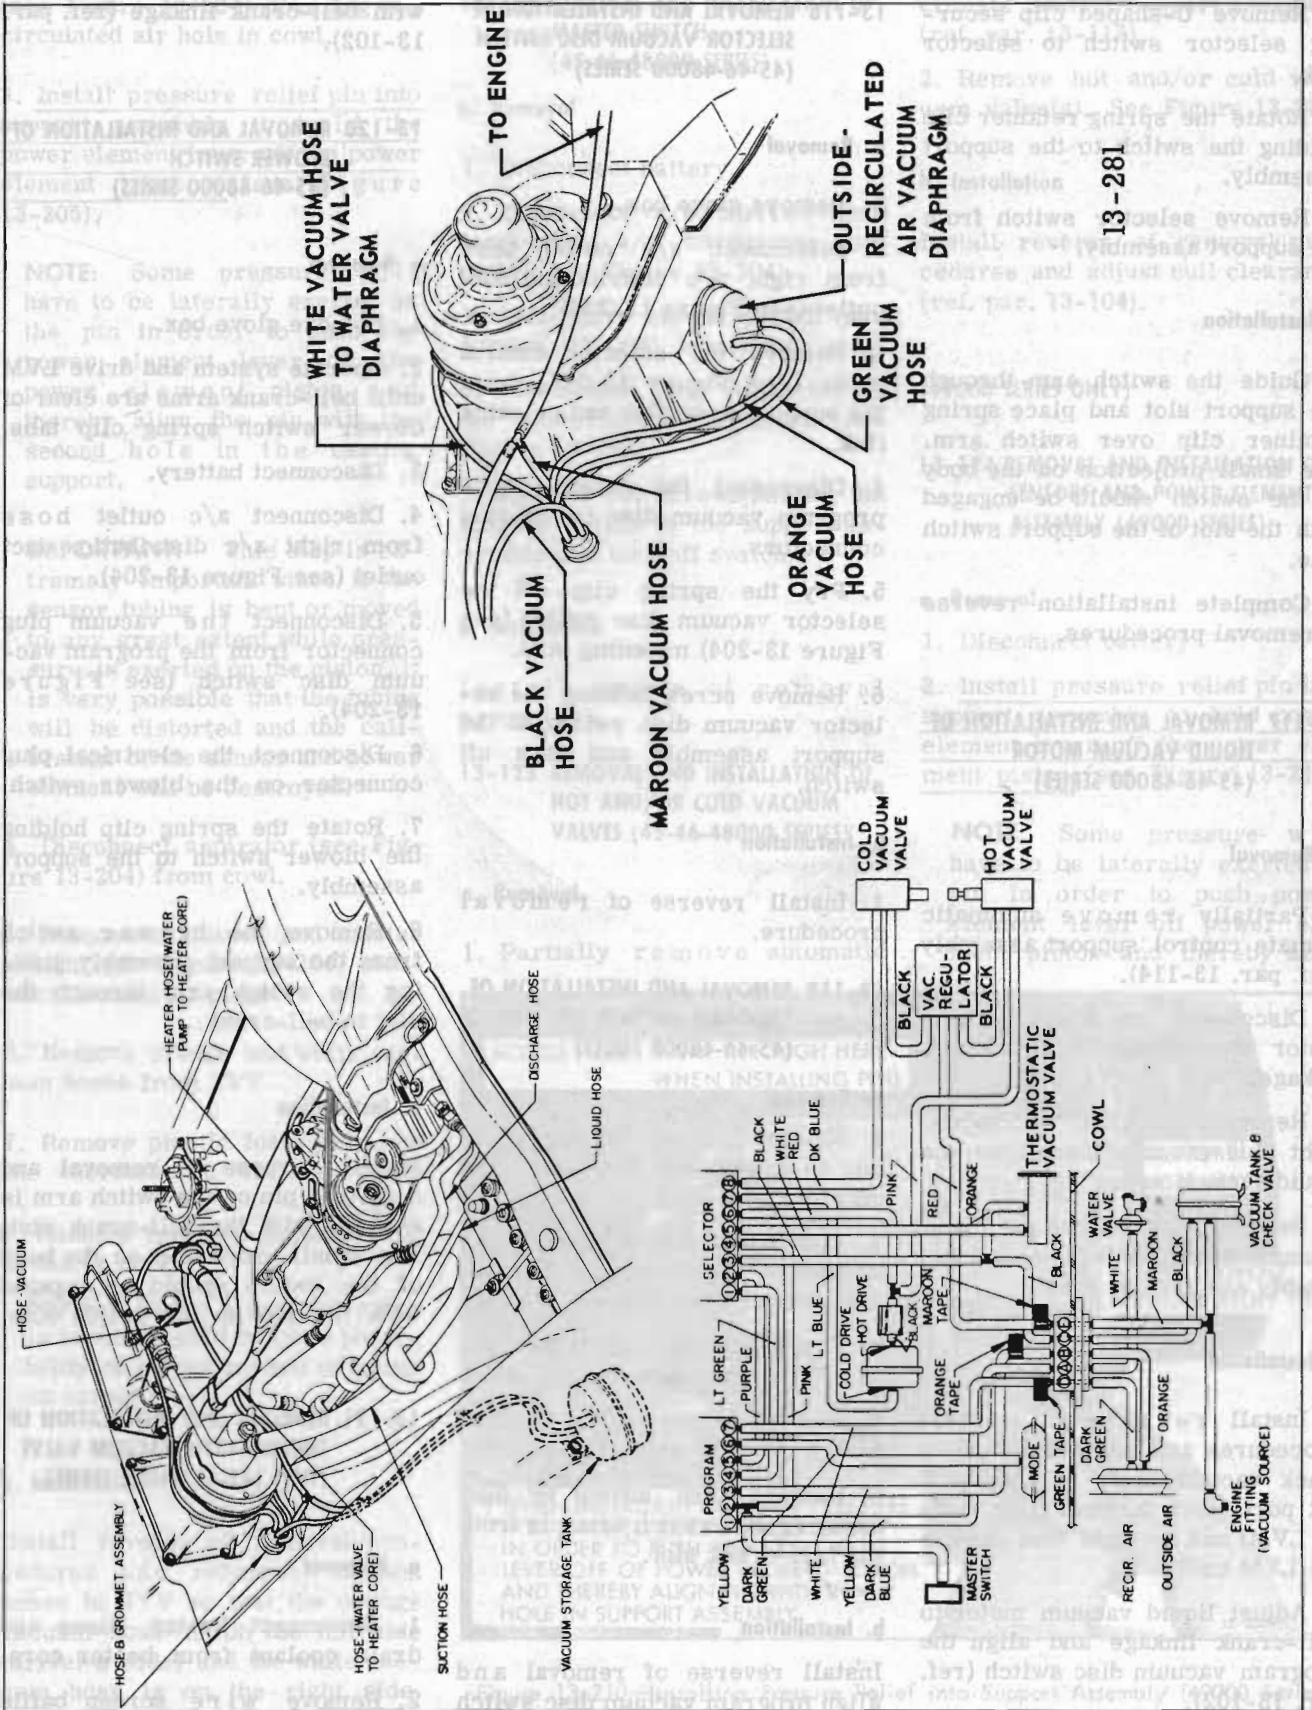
Vacuum Hose Installation (45-46-48000 Series)
